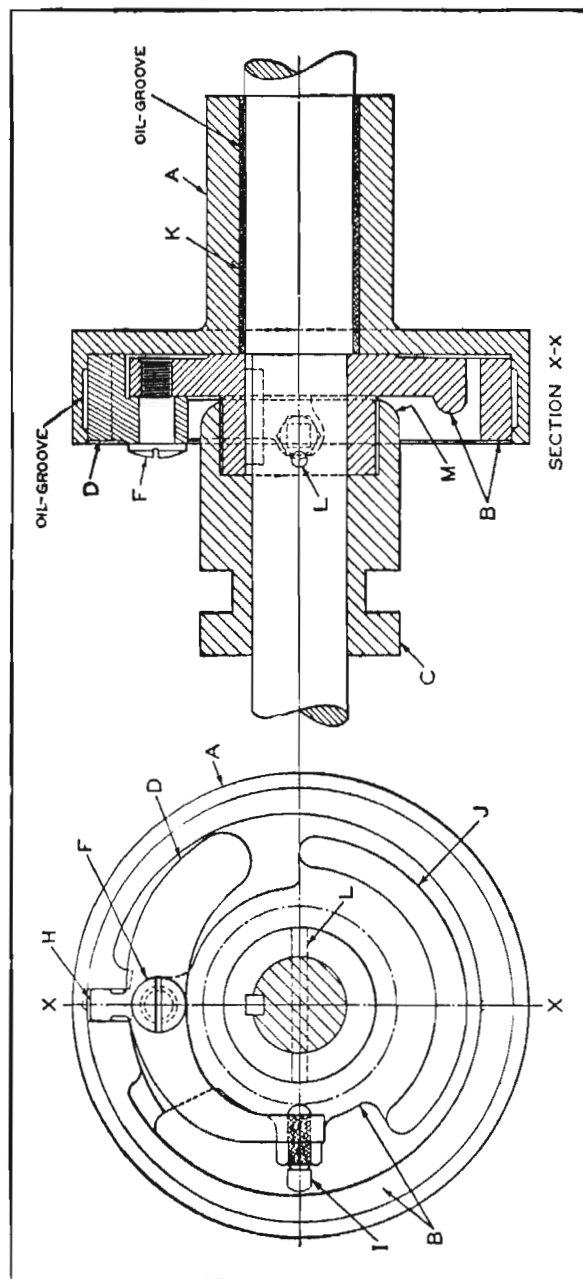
Friction Clutch Designed for Use at High Speeds.
